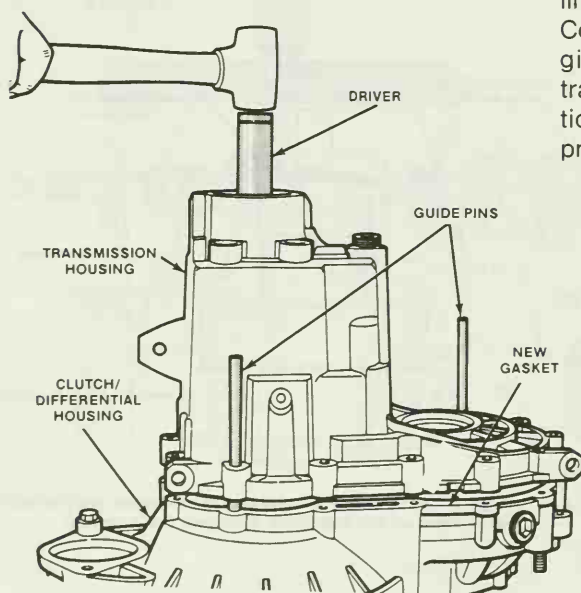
Installing the transmission case onto the clutch housing. (Chrysler Corporation)
